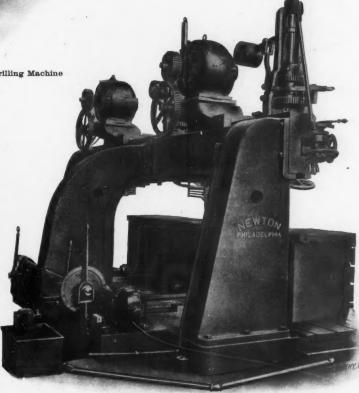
Rear View of Newton Two-spindle Drilling Machine, showing Motor which operates the Adjustable Work Tables
